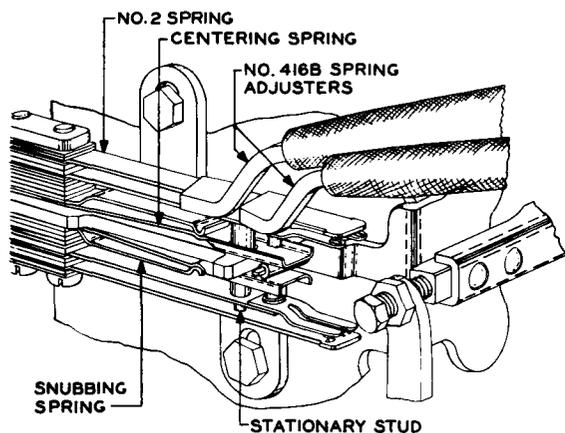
Fig. AA – Method of Adjusting No. 2 Spring for Contact Separation and Front Contact Make
